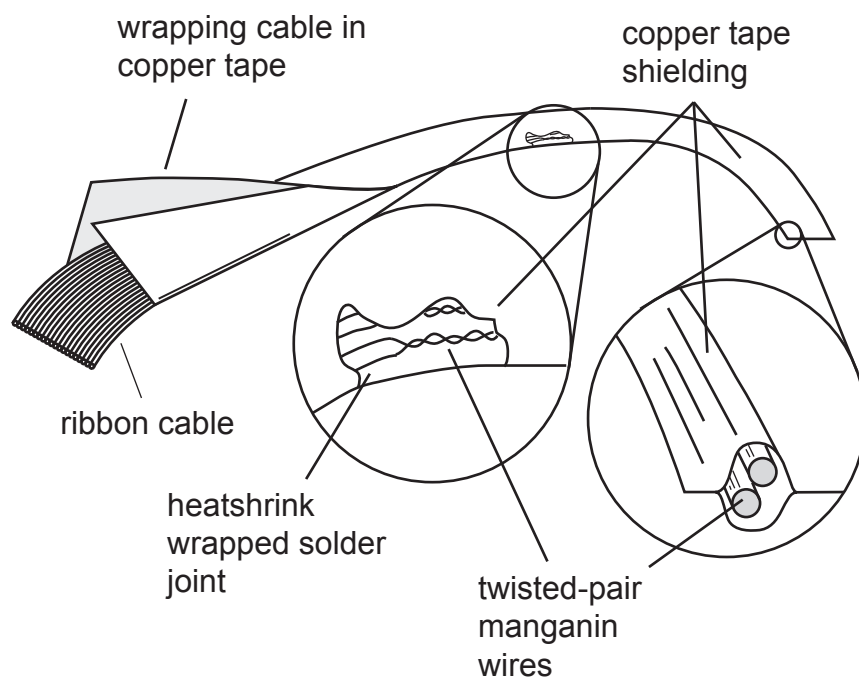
Tapeworm assembly diagram. This shows how the copper tape is wrapped around the wires to form a shield. The cutaway diagram shows how the twisted pairs are joined to the ribbon cable inside of the shielding. The cross sectional zoom to the right shows how each twisted pair has its own shield once the copper tape has been properly pressed.
